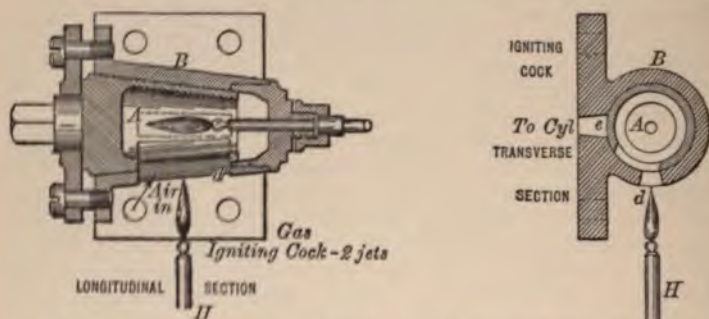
Barnett's Engine Gas Ignition Cock—Longitudinal and Transverse Section.
